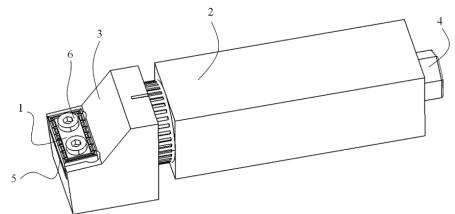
Tangential turning tool with linear tiltable cutting edge, assembled¹
